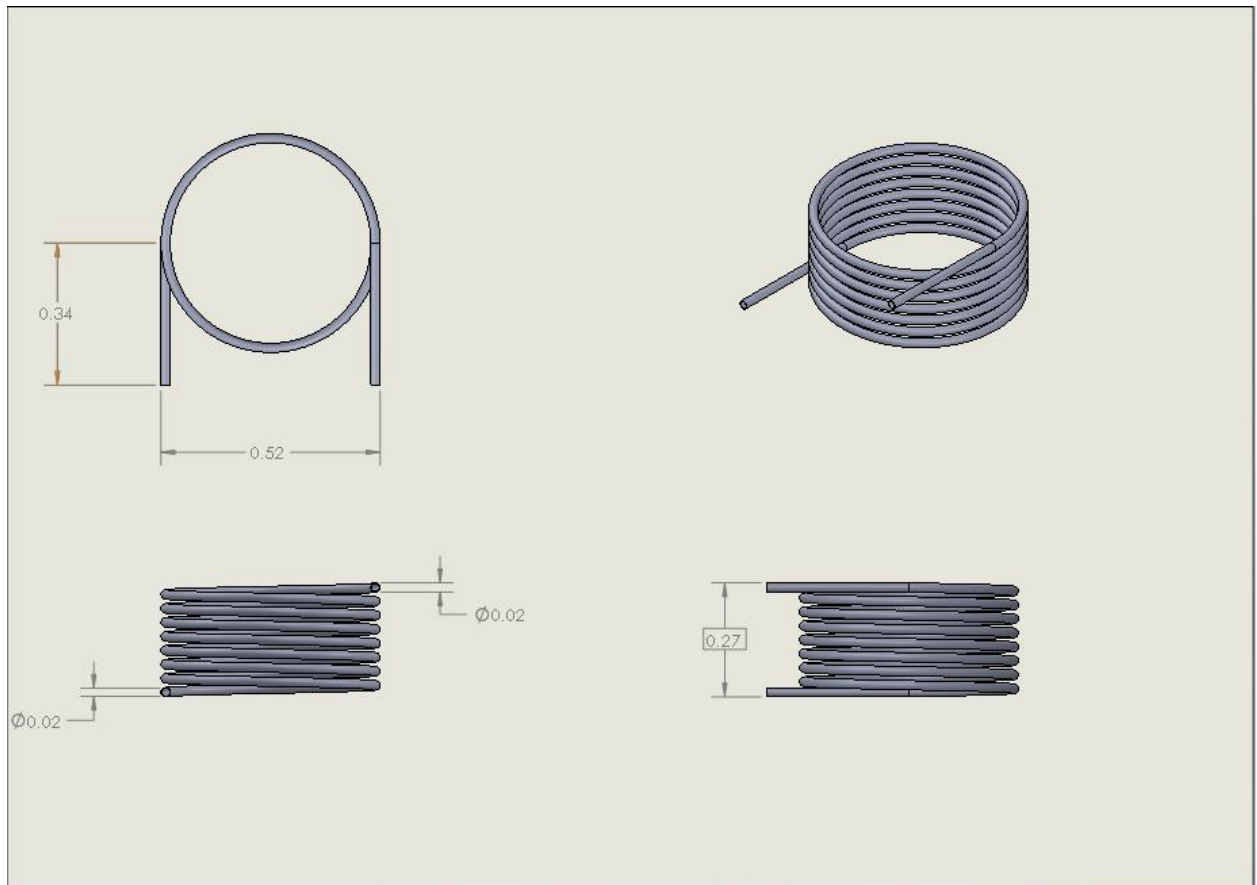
Detailed drawing of PCM-HE Copper Pipe
